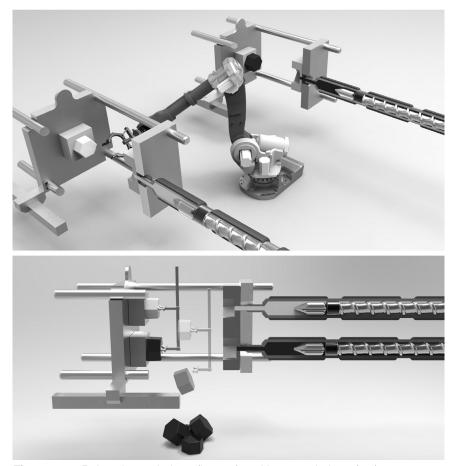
Relocating technique (bottom) and insert technique (top).
